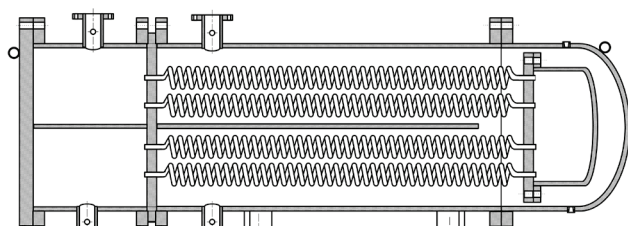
Shell and tube heat exchanger with parallel helical tube coils with internal floating head
